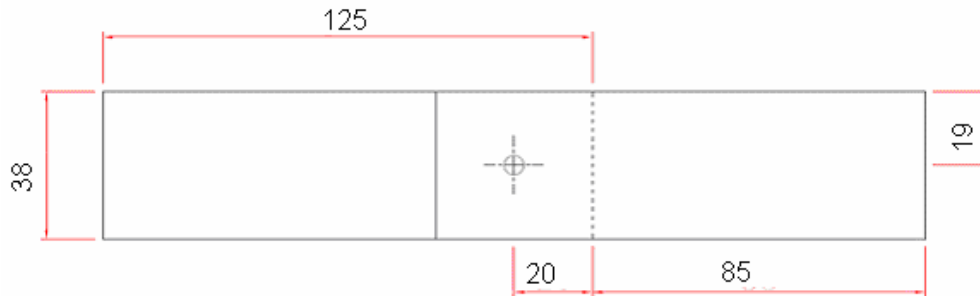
Schematic of the resistance spot welding specimen (unit mm).
